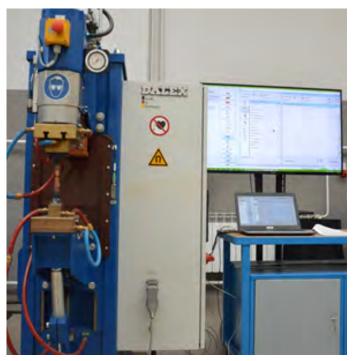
Test rig equipped with the PMS 14-6MF welding machine and the XPegasus system
